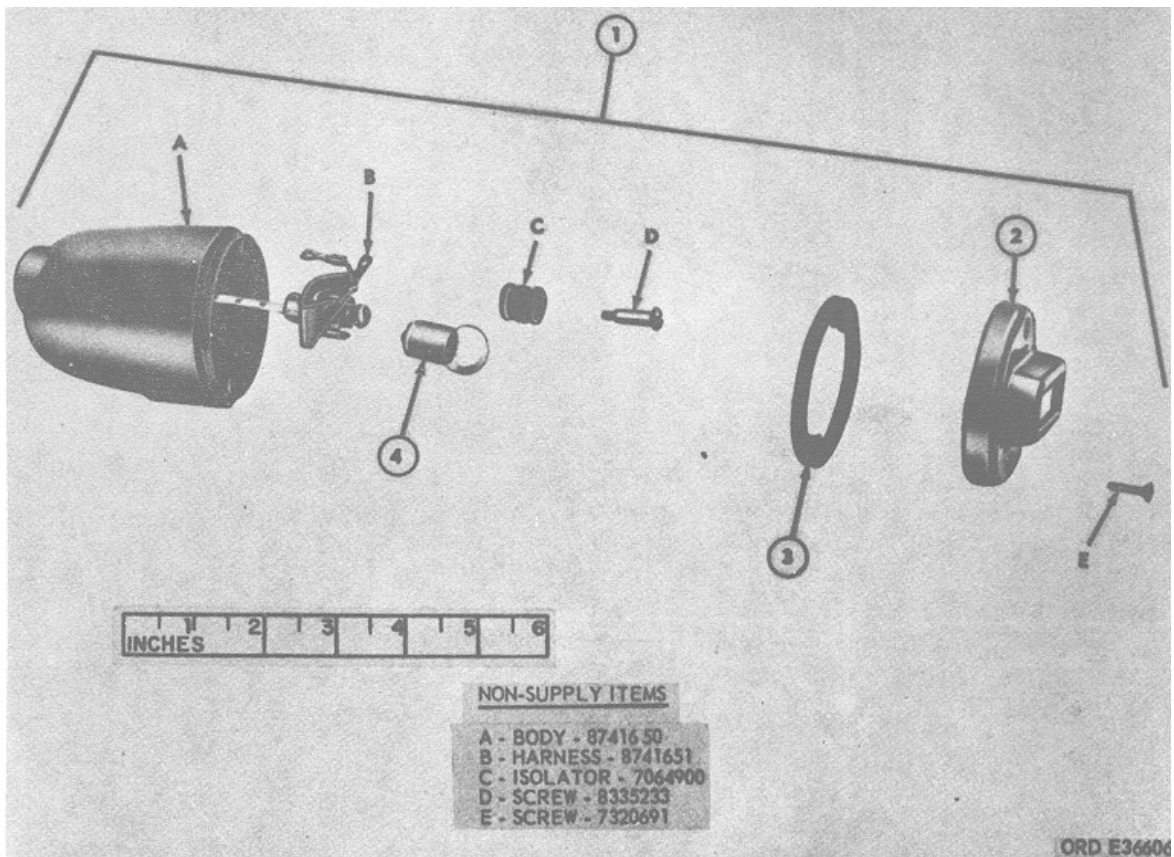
TAILLIGHT ASSEMBLY - EXPLODED VIEW.
